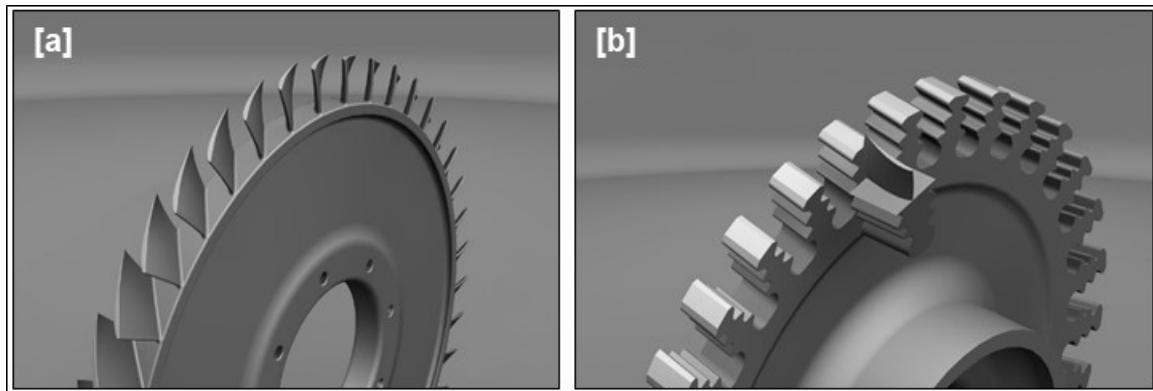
Compressor and turbine disk layout. (a) Integrally Bladed Rotor; (b) Blisk.
